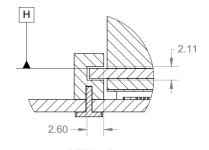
Large Form Factor Baseboard Chassis CTF Dimensions (Side View)
